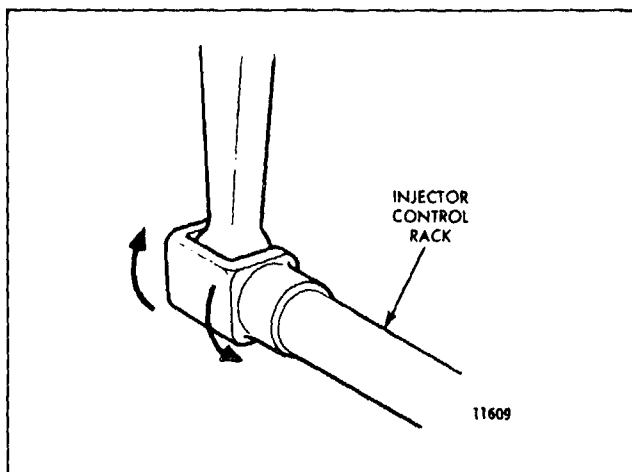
Checking Rotating Movement of Injector Control Rack
